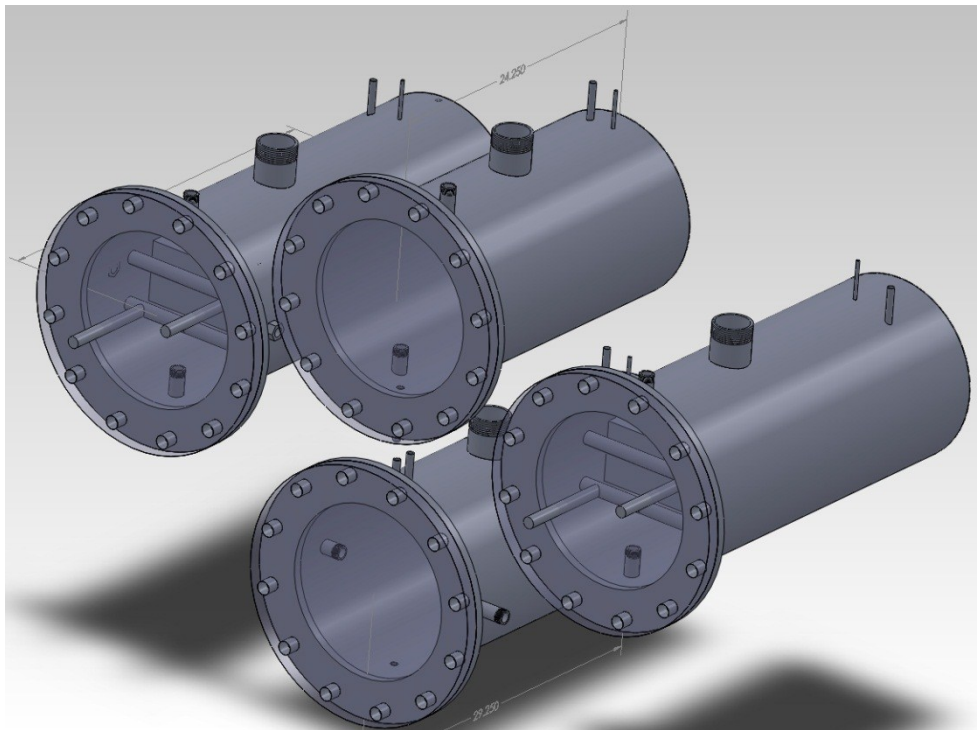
CAD drawing of vacuum chambers with flanges and locations of feedthroughs
